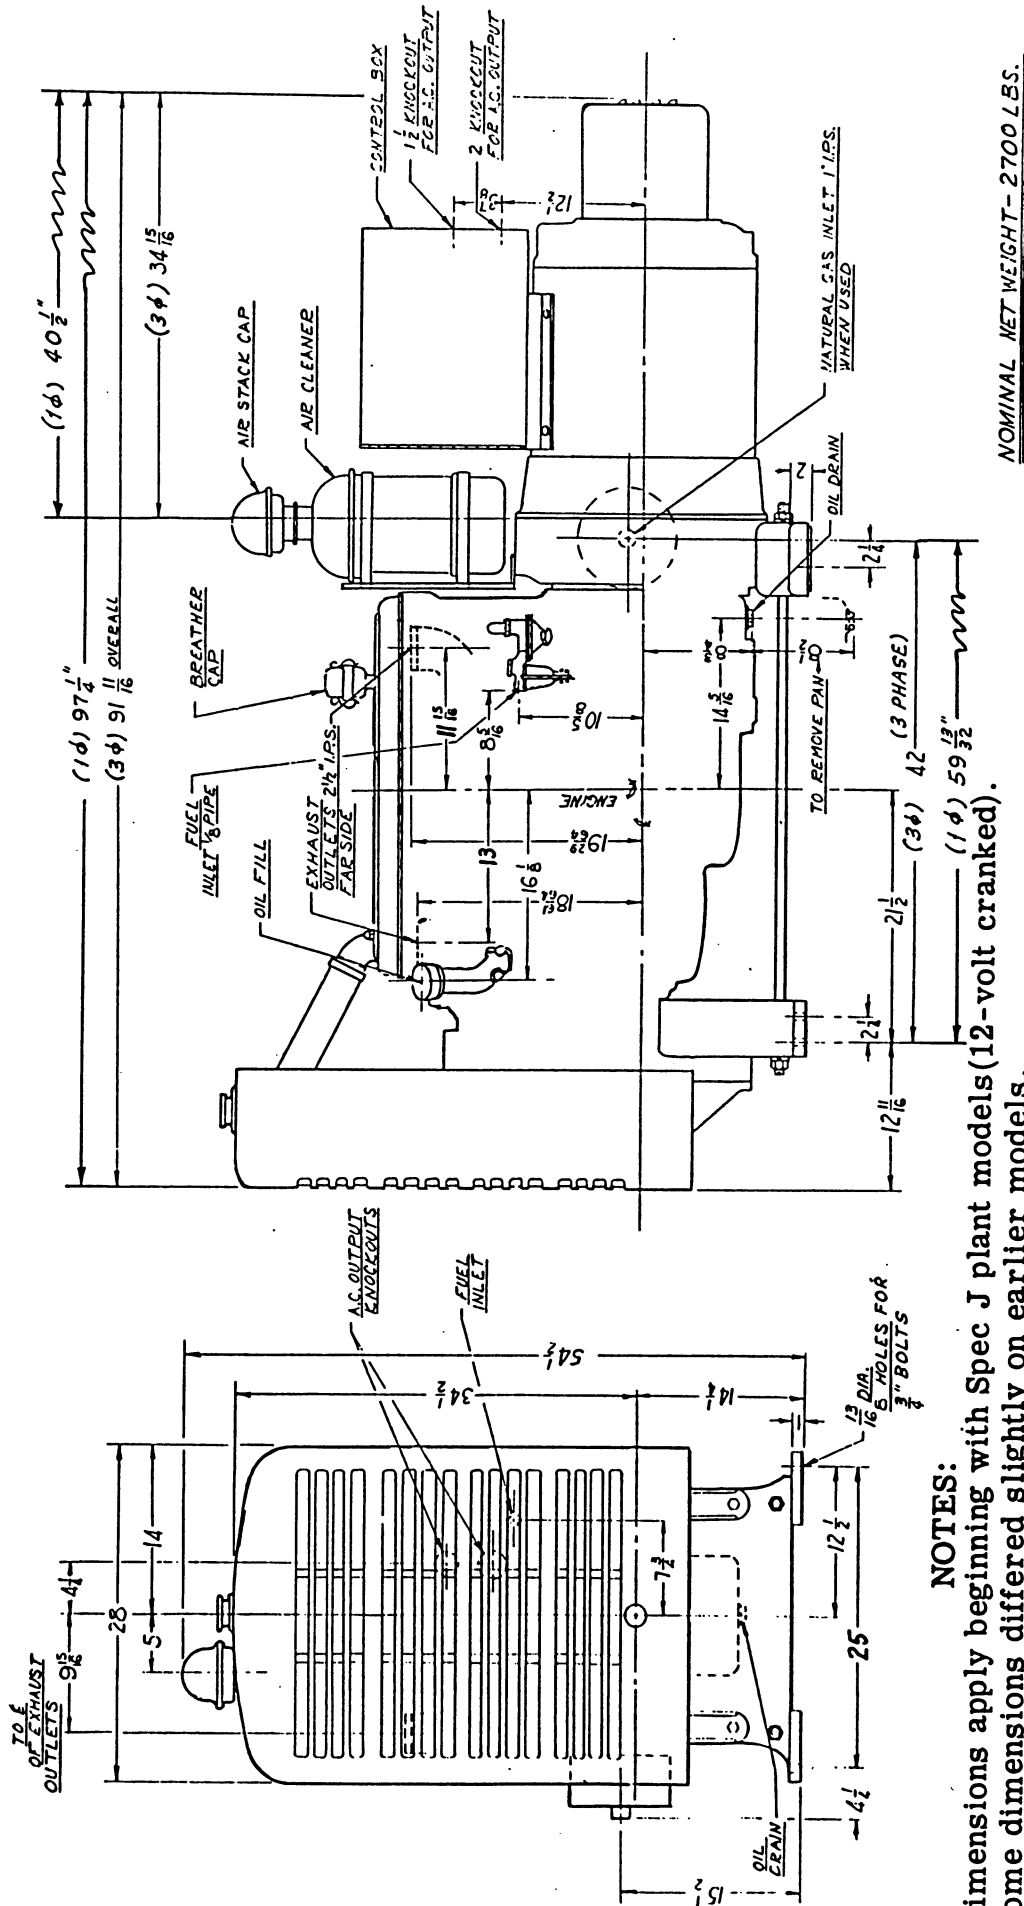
PLANT DIMENSIONAL OUTLINE
